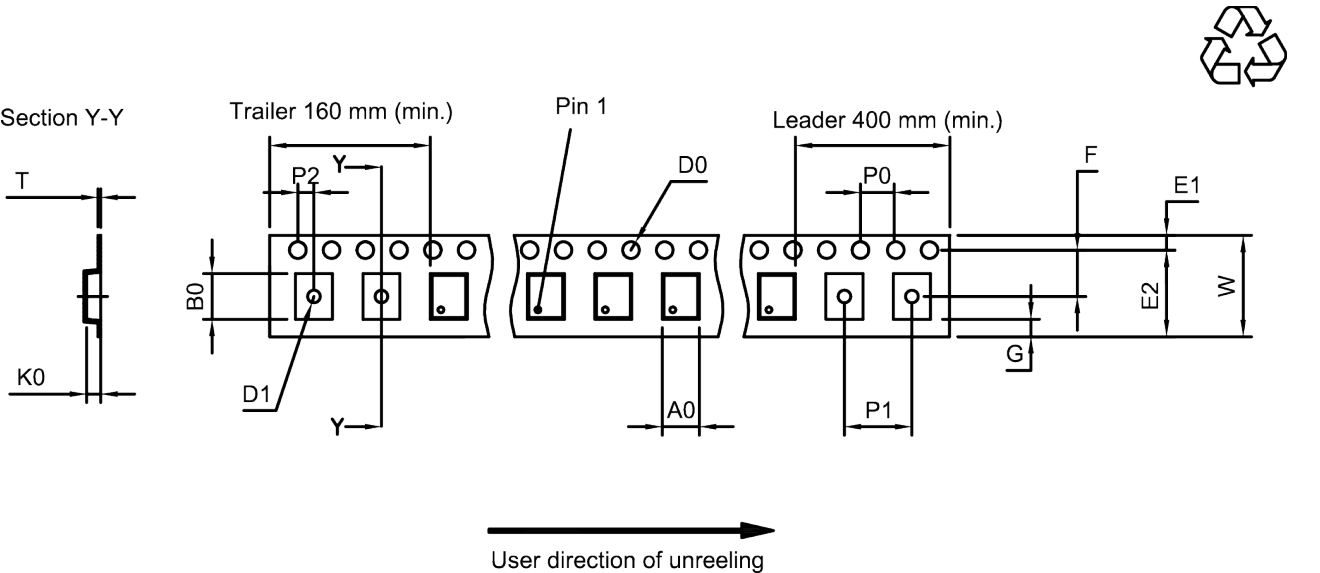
Drawing of tape (first-angle projection) with tape dimensions according to Table 1.
